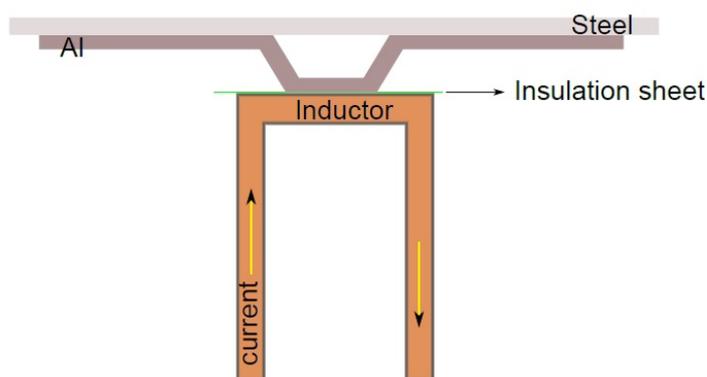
Schematic of the magnetic pulse spot welding process (MPSW).
